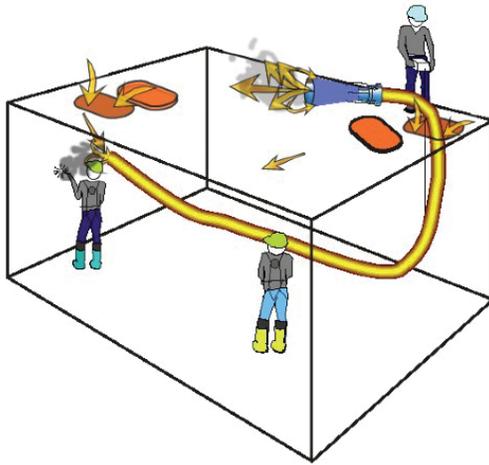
Showing the appropriate placement of ducting to remove welding fumes.
